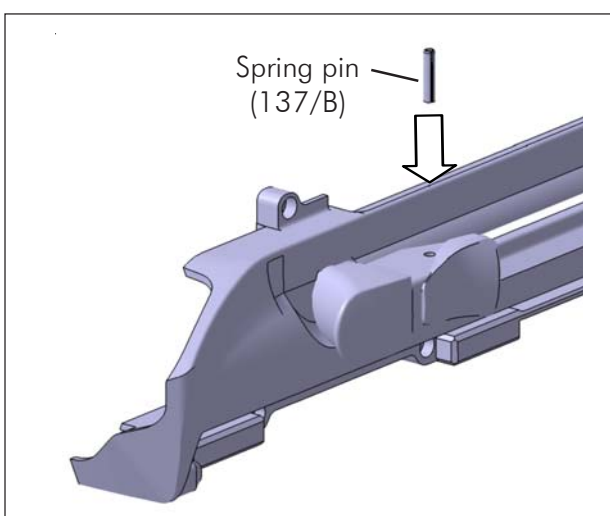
w - Reassembly of the spring pin (137/B)
